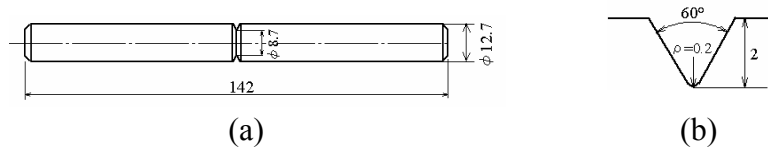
Fatigue test specimen. (a) Shape and dimension of the specimen for mode III crack growth test (Torsional fatigue). (b) Detail of notch; dimensions in mm.
